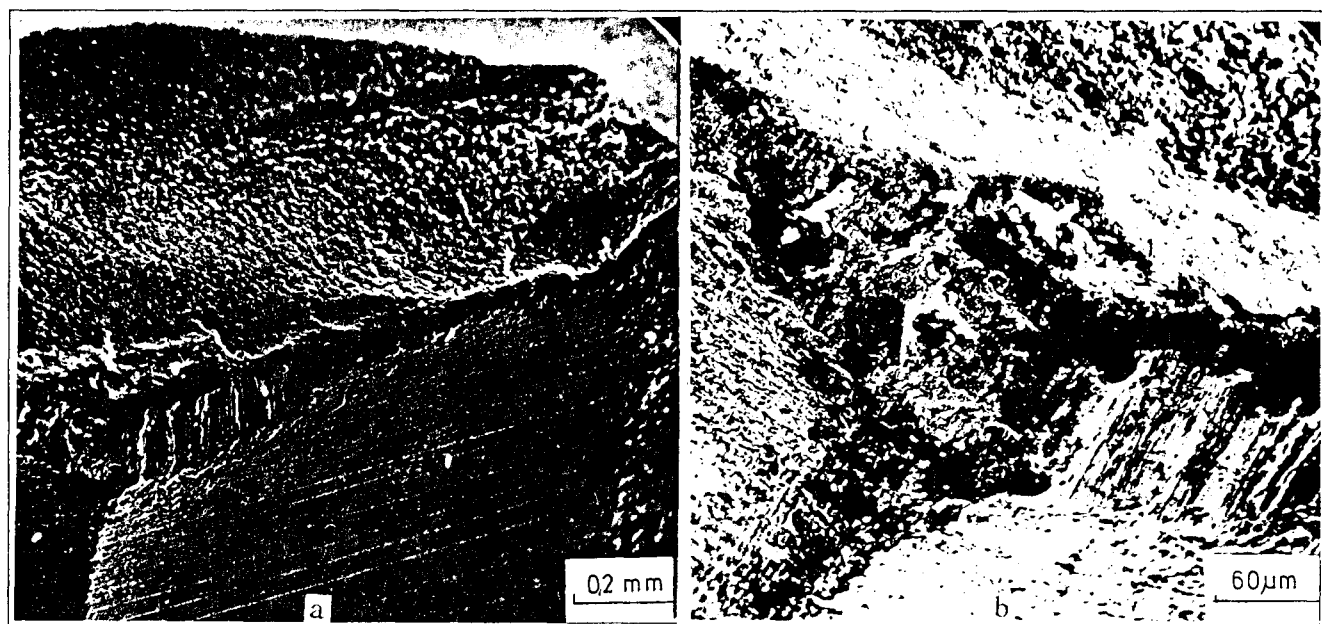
Oxidation and adhesive chipping of a) major flank surface; b) nose of tool
